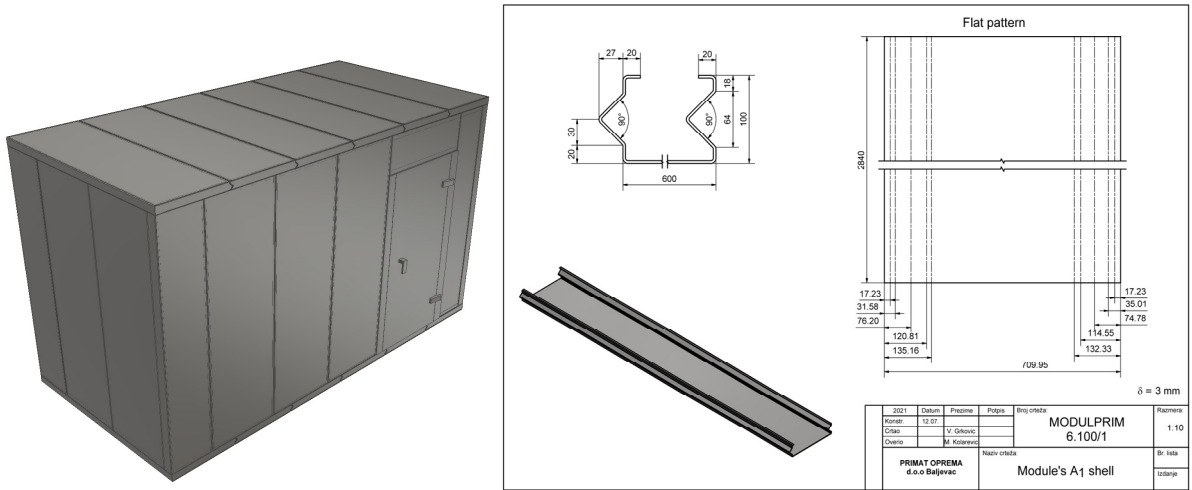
Custom 3D model of the MSR (left) and technical drawing of the A1 module shell (right)
